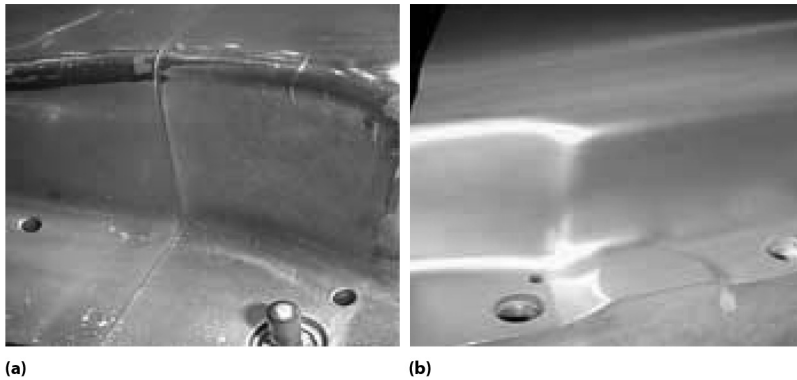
(a) Hard-chrome-coated Carmo die after 50,000 stampings. (b) Physical vapor deposition CrN-coated Carmo die after 1,200,000 stampings. Source: Ref 16.7
